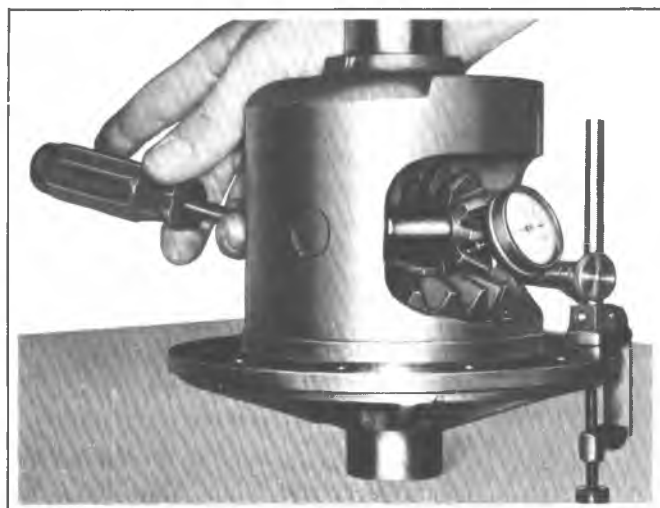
D--Measuring Pinion Gear Tooth Clearance
